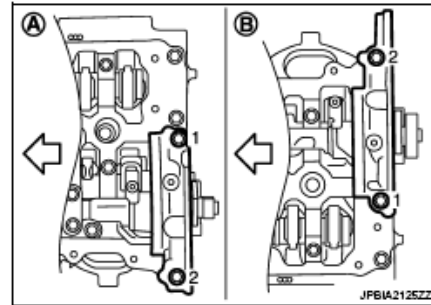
Identifying Actuator Bracket Mounting Bolt Tightening Sequence
